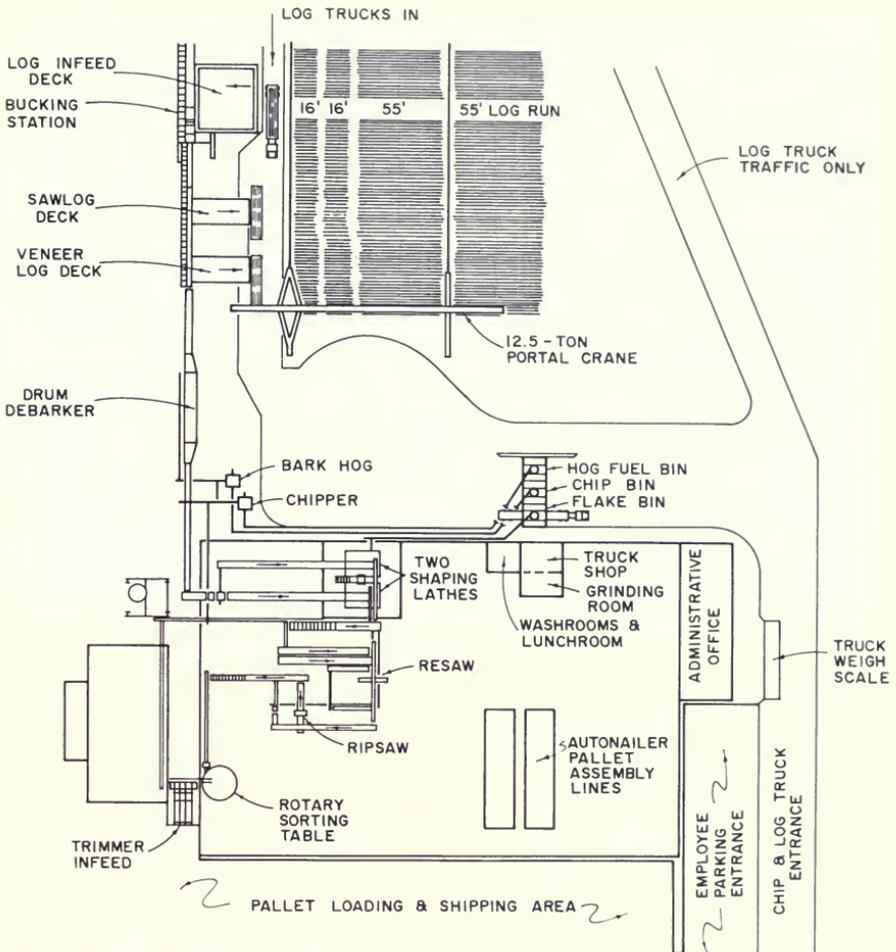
Plant layout for large-scale manufacture of pallet parts. (Drawing after Koch and Gruenhut 1981.)
